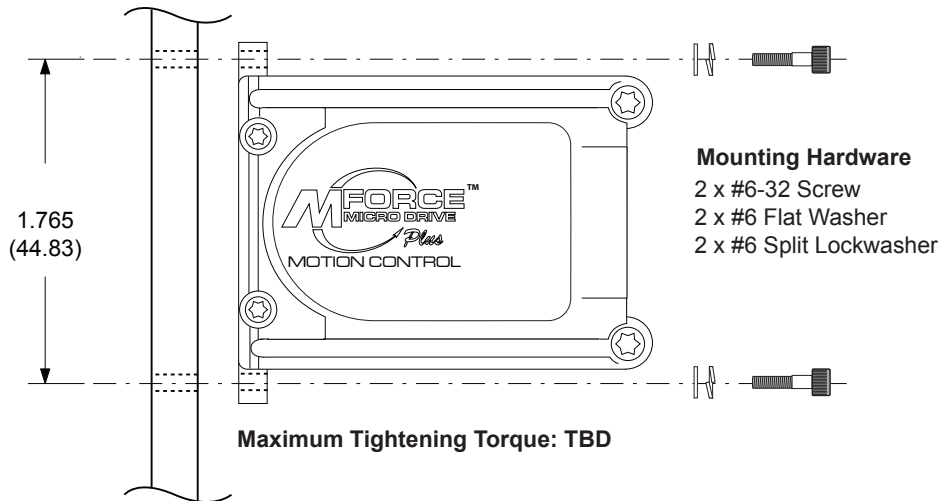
MForce MicroDrive Mounting Recommendations
